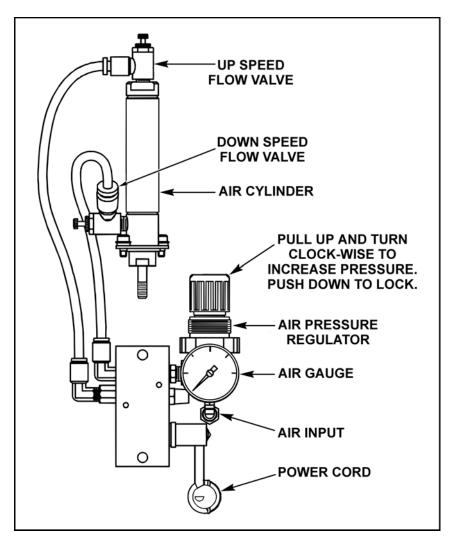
Typical Solenoid Air Valve Assembly with a Single Regulator
